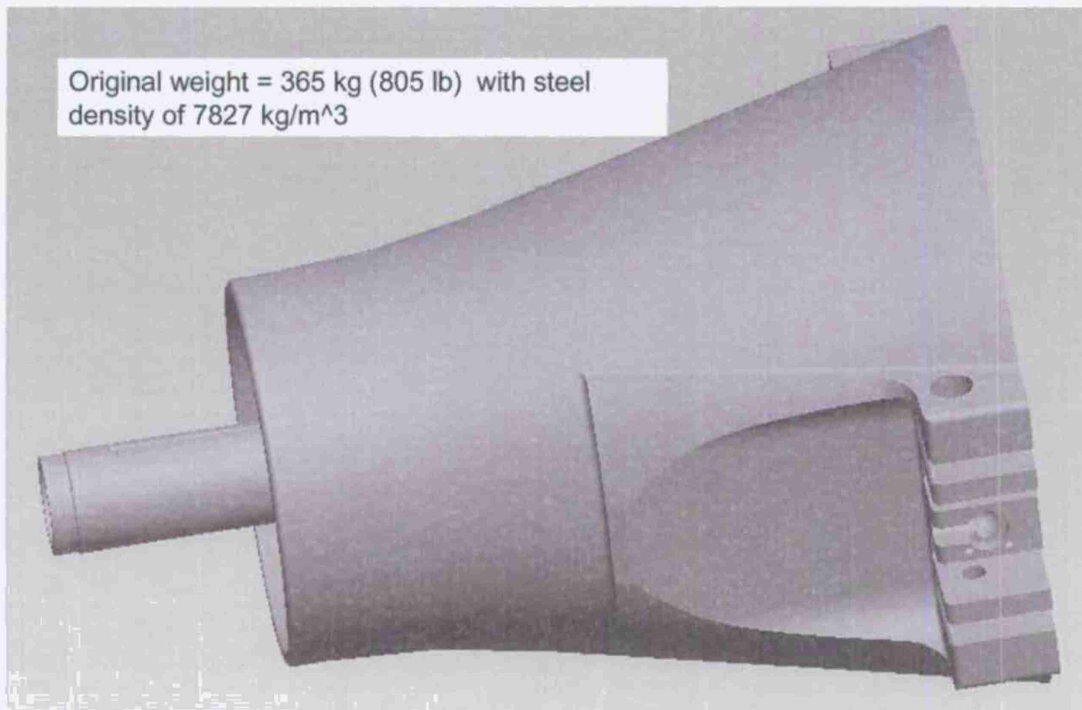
View of the first breech nozzle casting weighing 365 kg.
